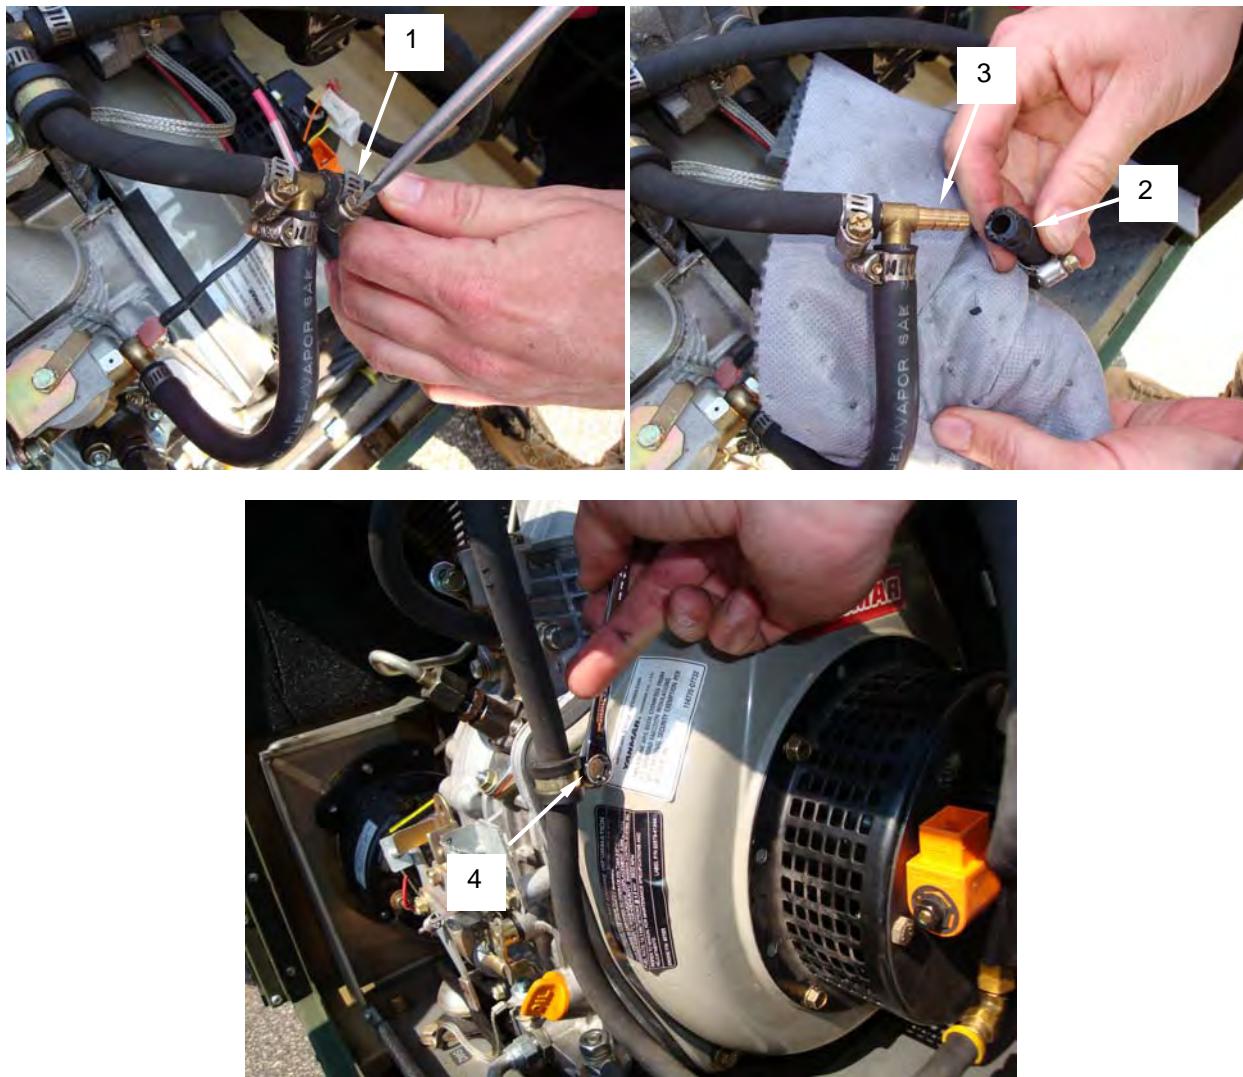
Remove Fuel Supply Hose from Tee and Clamp from Flywheel Housing.
